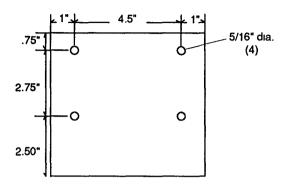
1-Torch Operator's Panel - Mounting Dimensions
